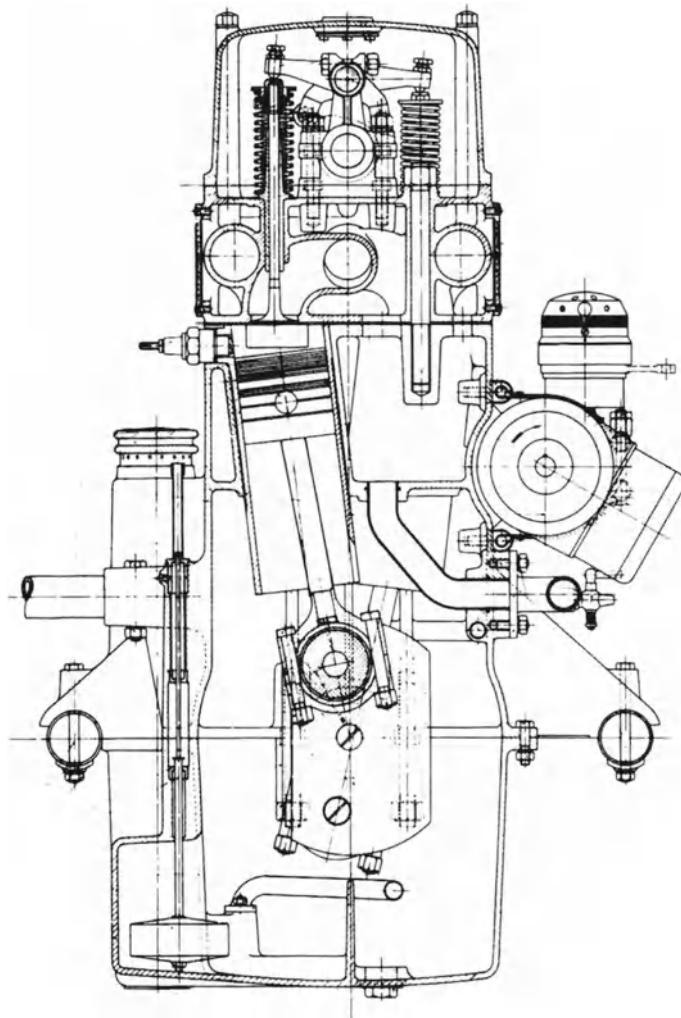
A 1922 Lancia engine in which two modern features appear: detachable cylinder head and overhead valves (courtesy of FIAT Historical Archives)
